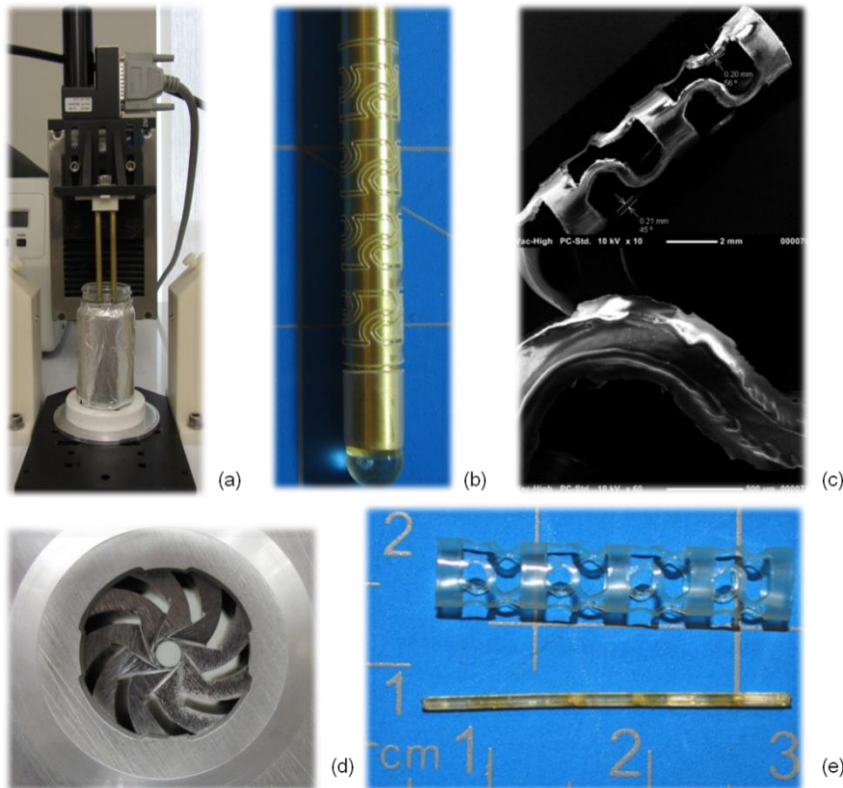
(a) Dip-coating assembly use to fabricate stents; (b) Brass pin surrounded by thin SMP tube, after dip-coating, drying, electron beam crosslinking, and CO2 laser machining; (c) SEM image of the stent after removal from brass pin. (d) Machine Solutions, Inc. SC150-42 Stent Crimper; (e) SMP neurovascular stent in primary geometry and crimped geometry.
